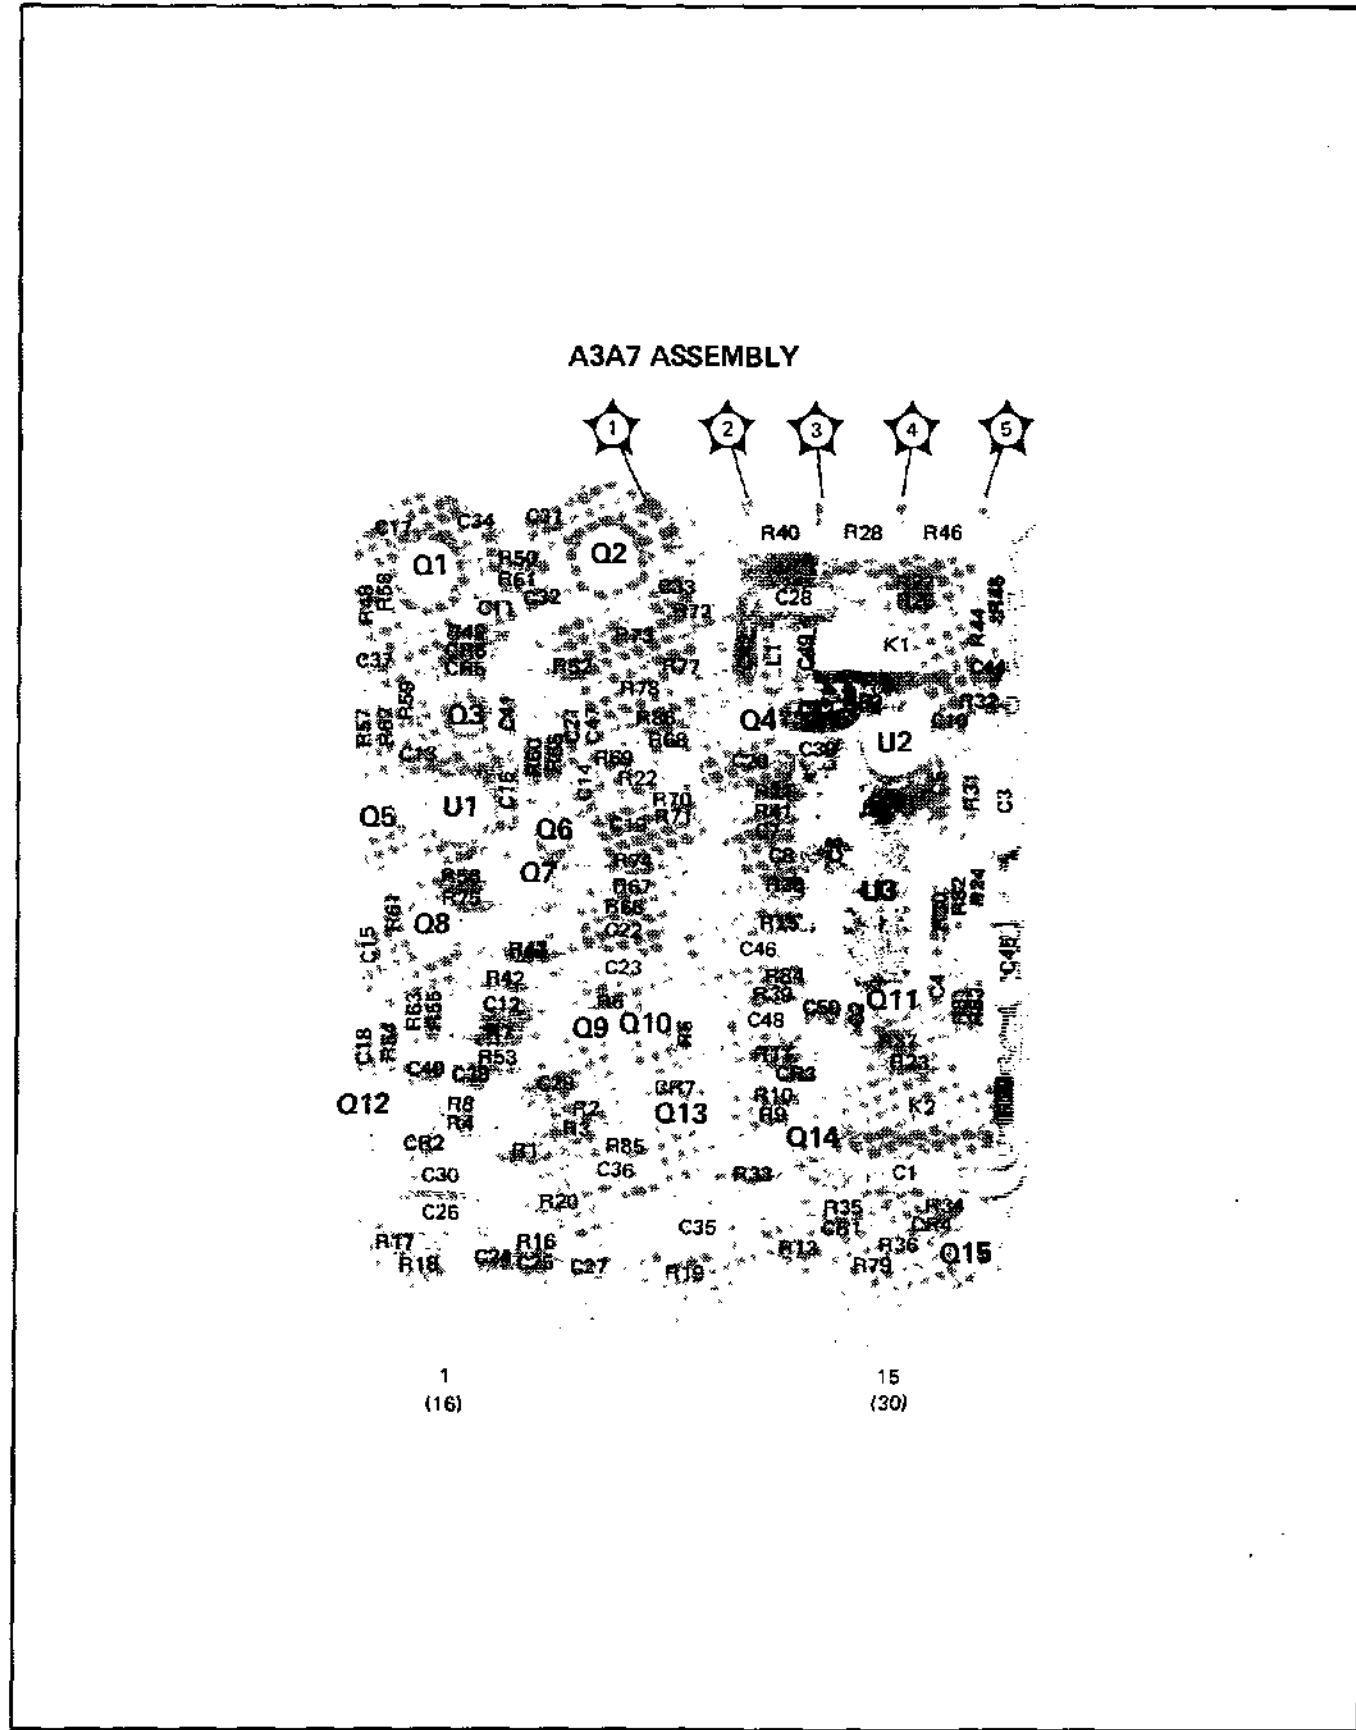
A3A7 YTO/FM Coil Driver Assembly Component and Test Point Locations
